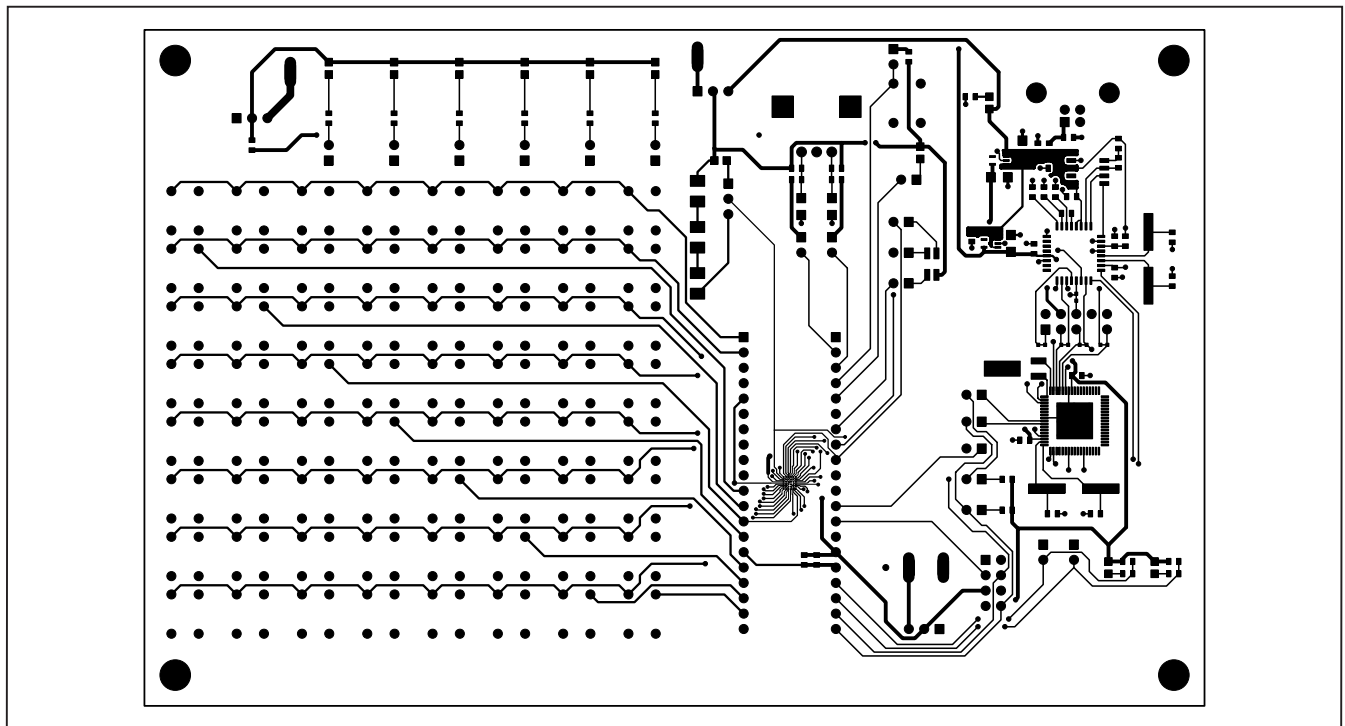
MAX7360 EV Kit PCB Layout—Component Side
